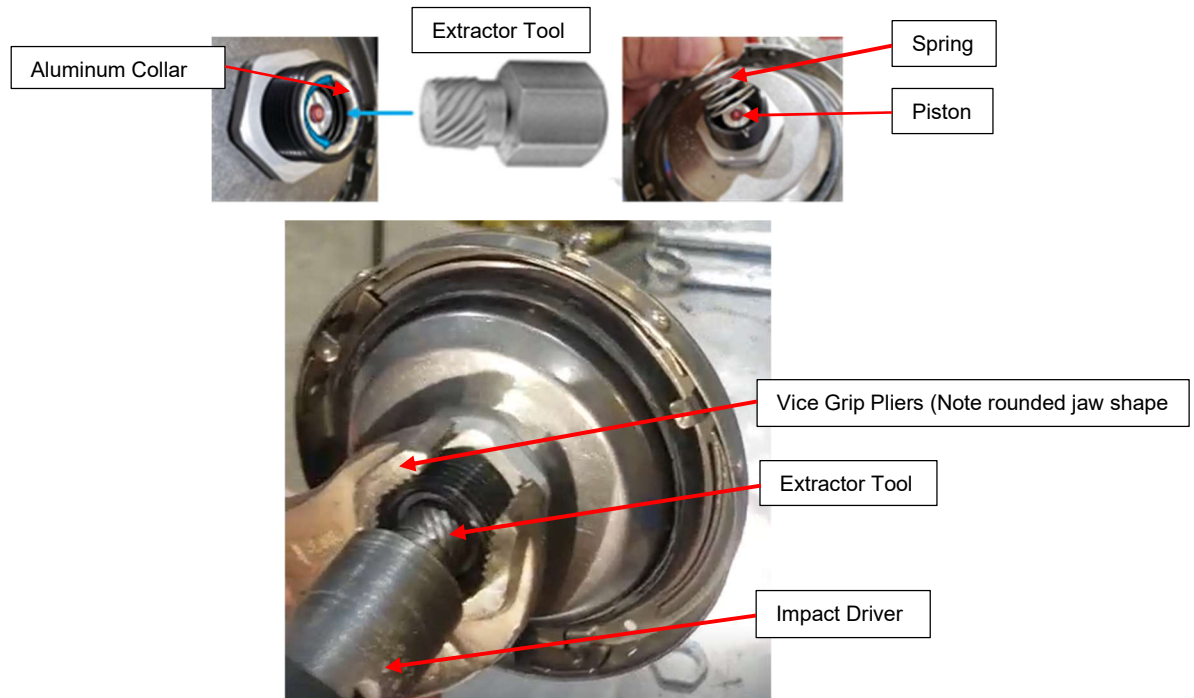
Using an Extractor Tool to Remove the Aluminum Collar in the Breather
